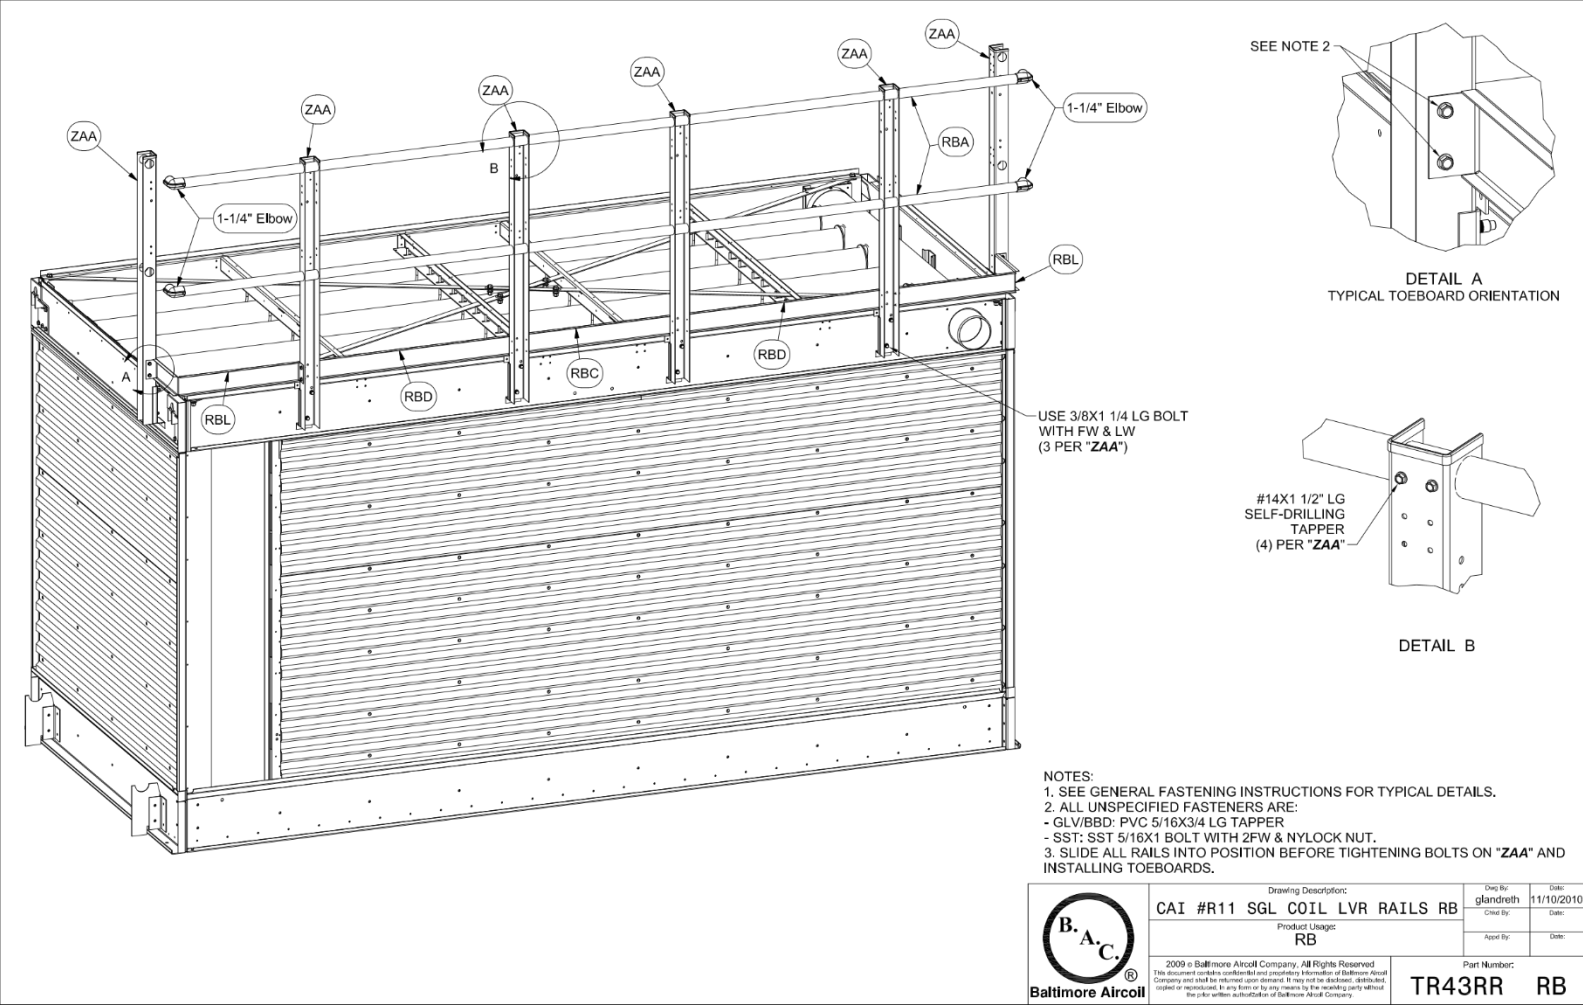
TR43RR Louver Face Railing Installation on Single Cell Unit, No Ladder Opening
